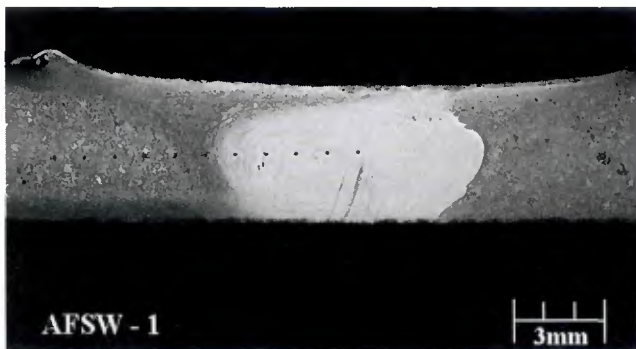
Cross section of a friction stir weld made on 5-mm cast AZ91 (right side is advancing side).
